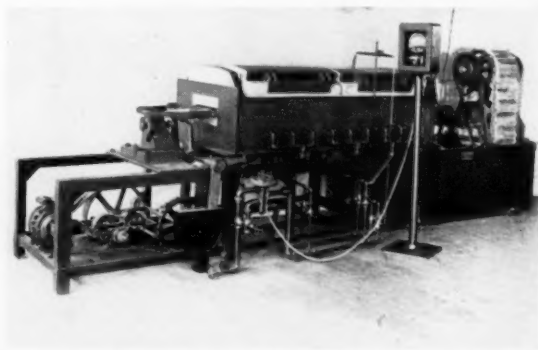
An early photograph (1922) showing the first reciprocating heating machine. Note the simple motivating mechanism. Also illustrated is an early style continuous quench tank with a rotary drum and a lift bucket conveyor.
